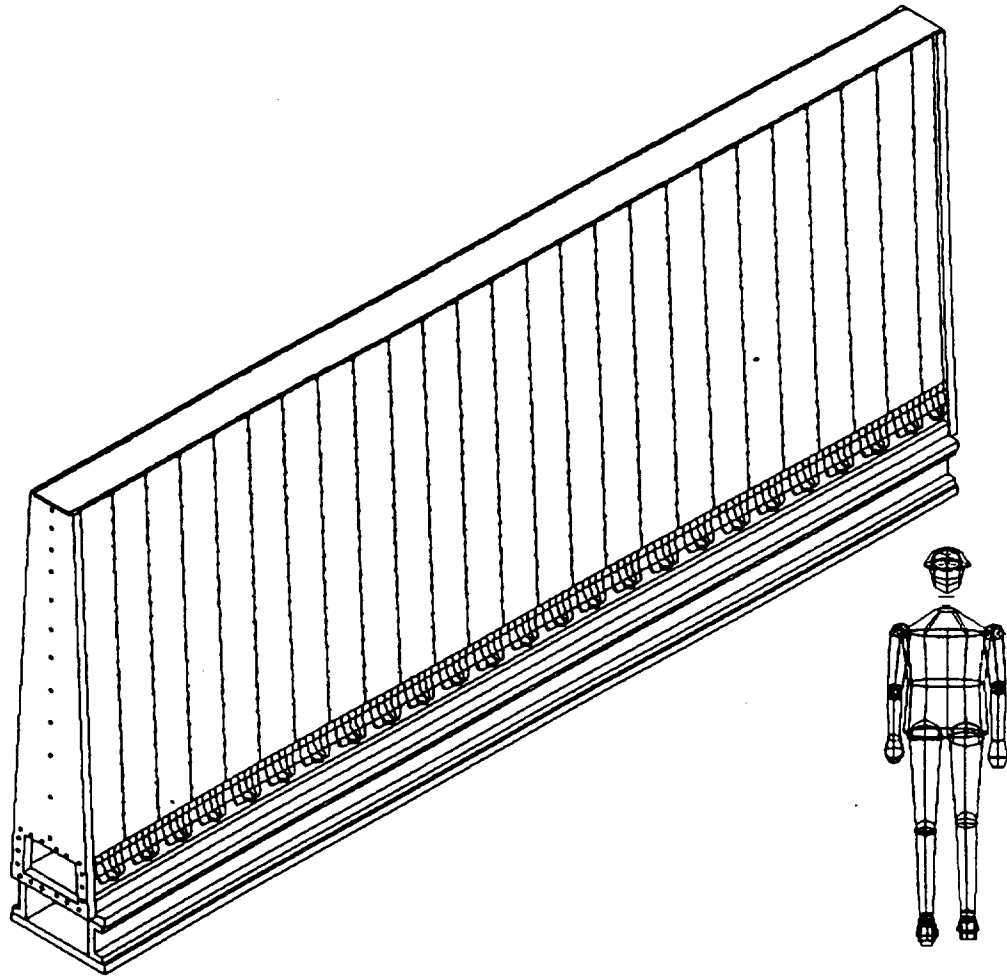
Machining and polishing of fiber bundle ends, mounting of bundles to girder.
